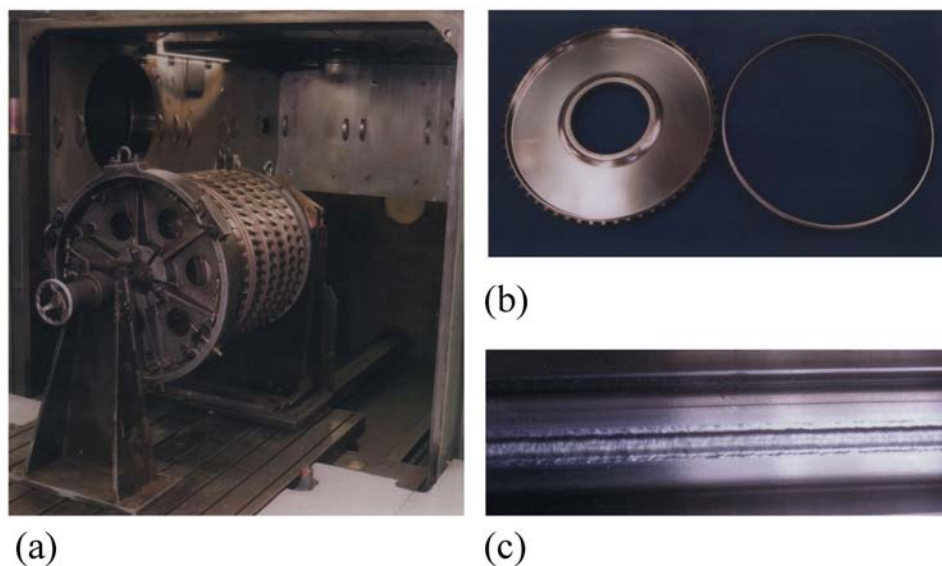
Rotors of disc and drum construction in compressor assembly.[7]
